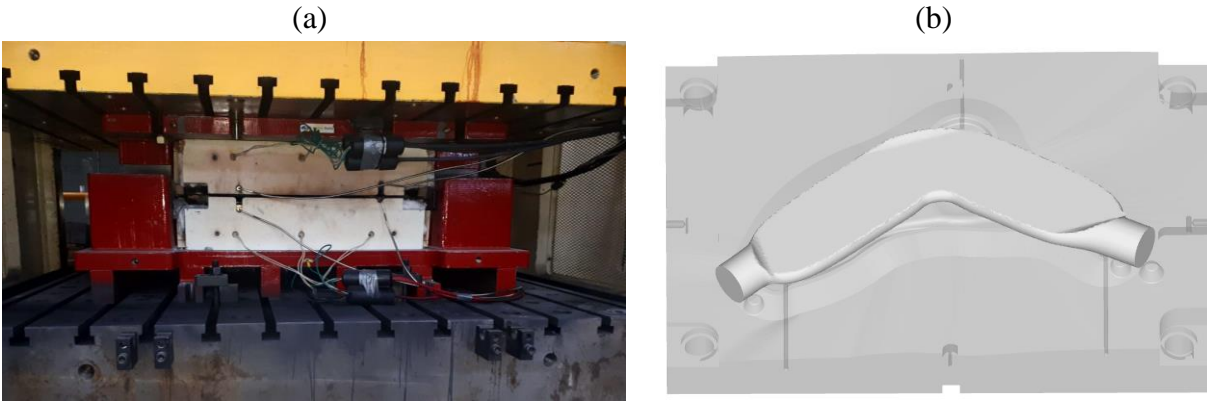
(a) The control arm forging tool used in closed-die forging experiments; (b) the wrought AZ80 alloy preform used to forge the control arm—obtained following bending and flattening operations
